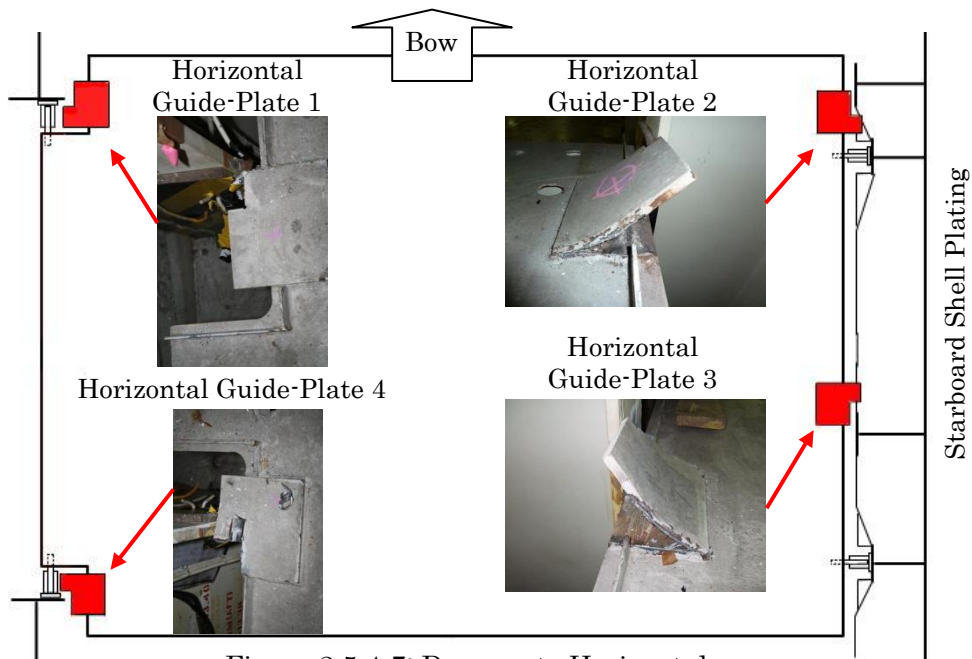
Damage to Horizontal Guide-Plates
